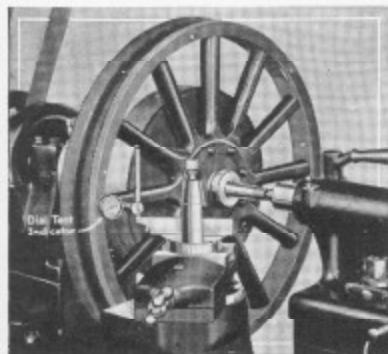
Testing Face of Wheel Felloe with a Dial Test Indicator
